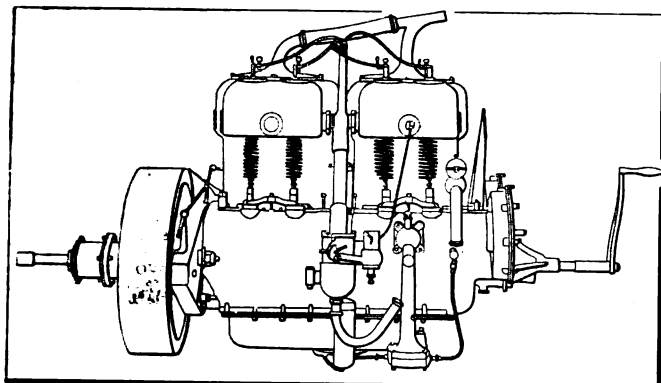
Intake side of the motor of the Marmon "32," showing the low-hung carbureter
